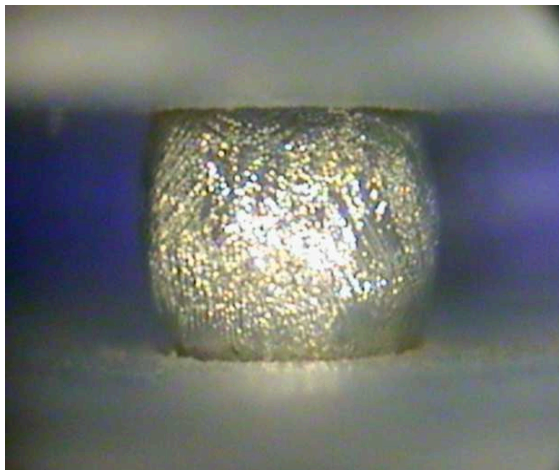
Close-up detail of solder joint created between two dimpled LTCC substrates
